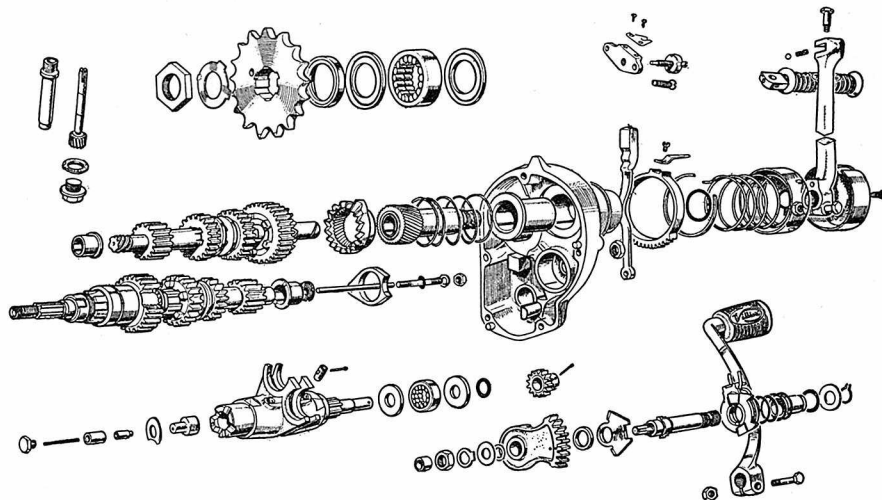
Exploded view of four speed transmission used on 2T and 3T.
